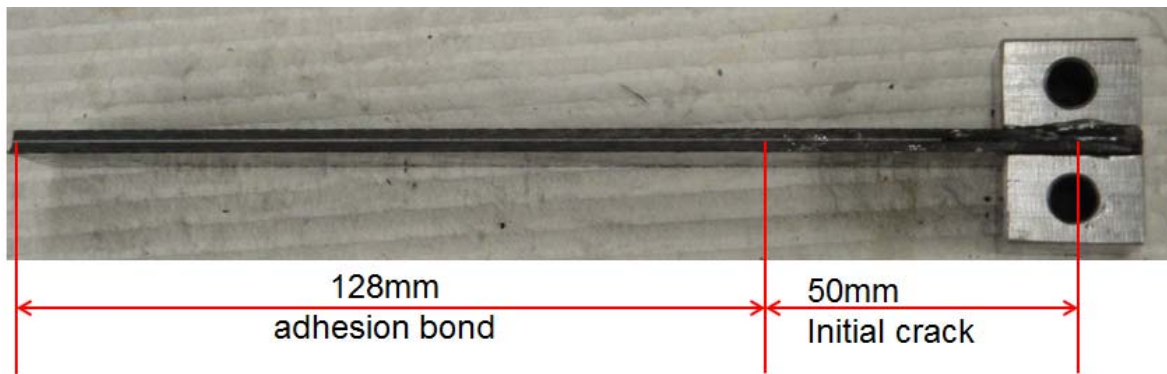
Optical image showing the geometric details and dimensions of a DCB specimen.
